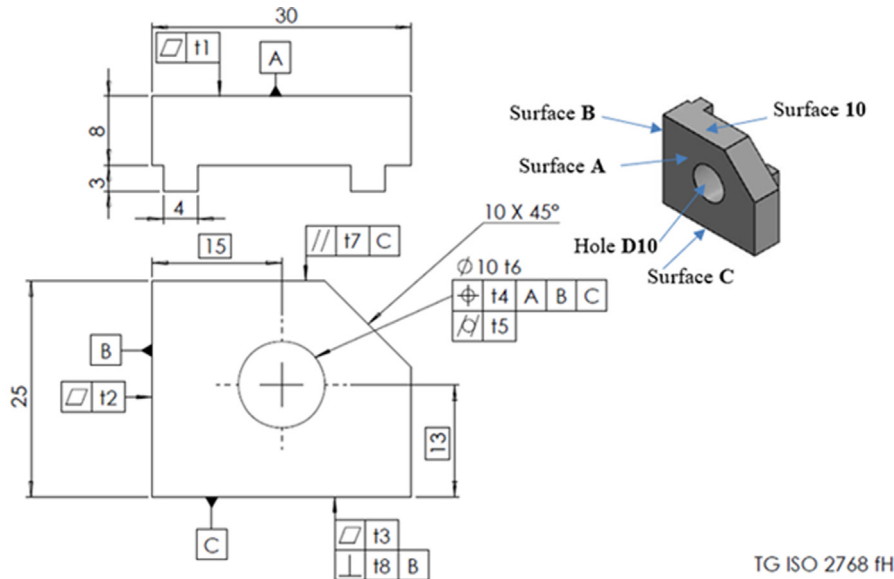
Views of the workpiece, surfaces and features nomenclature.
